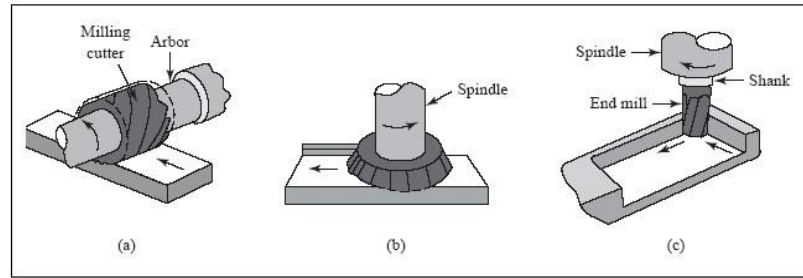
The three basic milling operations: (a) milling, (b) face milling, (c) end milling
